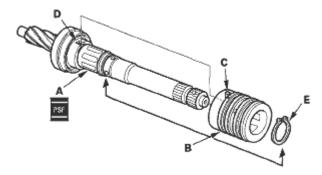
Applying Power Steering Fluid To Seal Rings On Sleeve Courtesy of AMERICAN HONDA MOTOR CO., INC.
